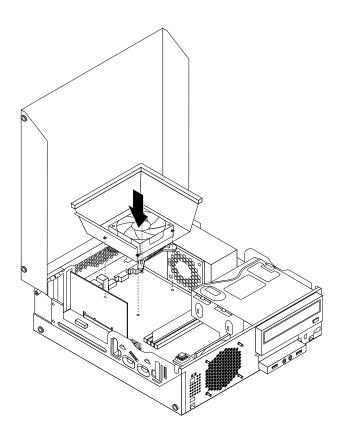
Reinstalling the heat sink and fan assembly with the fan duct
